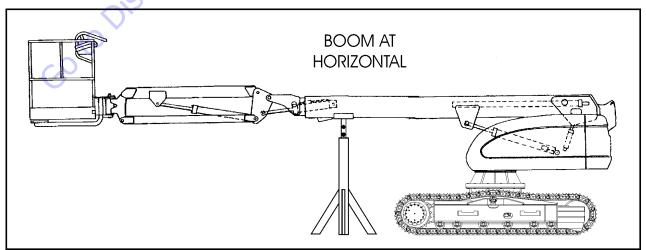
Boom Positioning and Support, Cylinder Repair
